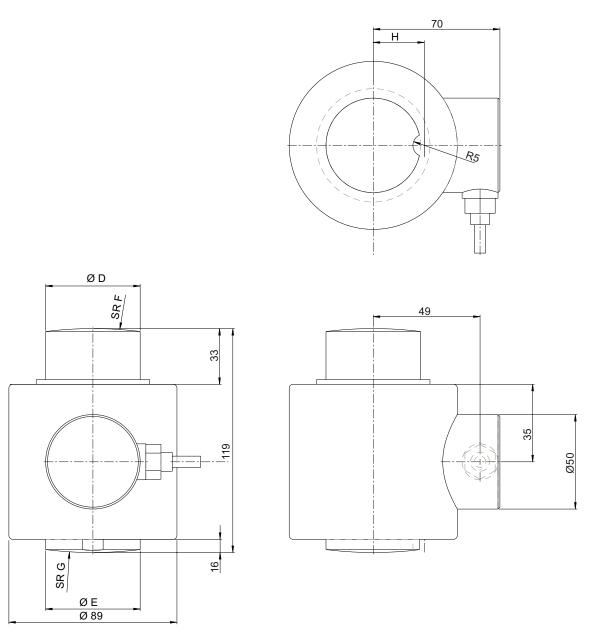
SIWAREX WL270 CP-S SA dimension drawing
